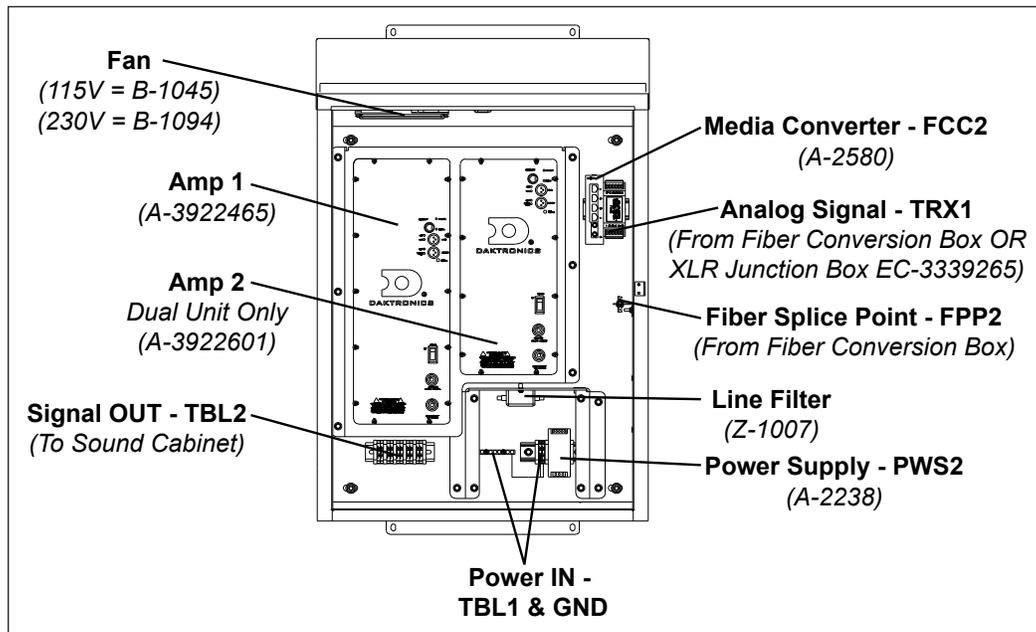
Control Enclosure Components & Connections (Covers Removed)
